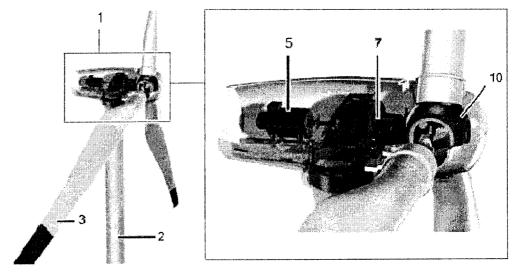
the layout of the whole machine 9 (1-nacelle ; 2-tower ; 3-blade ; 5-generator ; 7-gearbox ; 10-hub)
